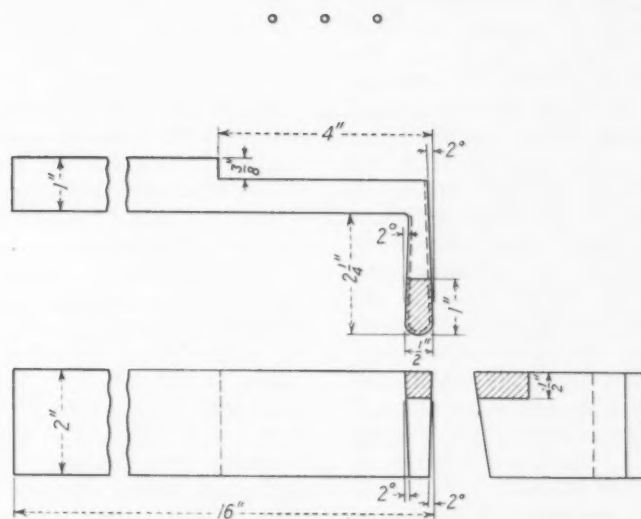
Tipped planer tool used to make a deep recess not only saves scarce material but also reduces costly breakage.
